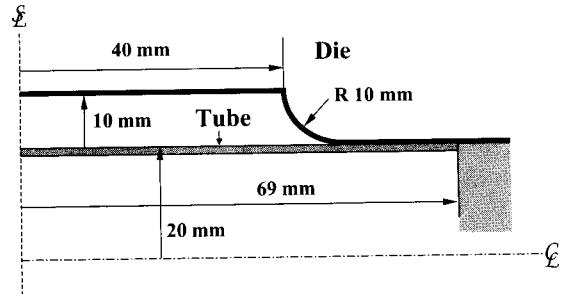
Tooling geometry of stepped circular tube hydroforming
